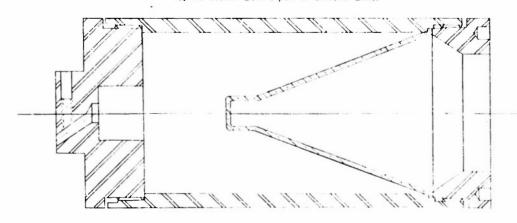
DRC506-1 90 mm. Penetration Test Assembly. 90/105 Scaled Counterpart of DRC376 Assembly.
